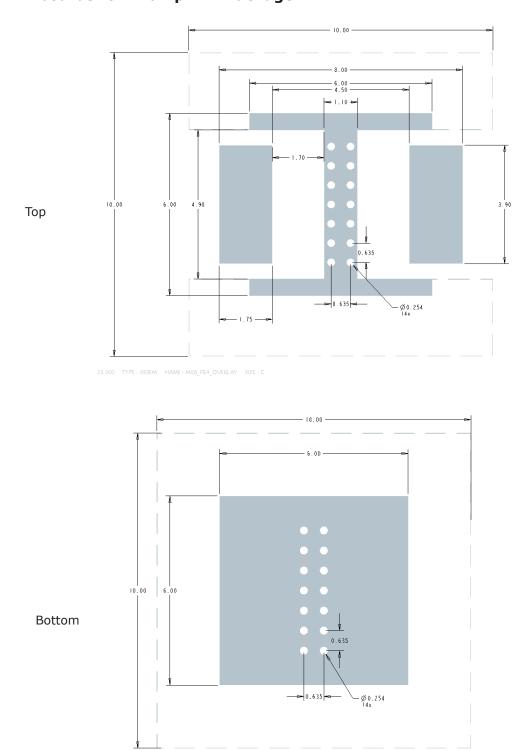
Recommended footprint for XLamp MX package on FR-4 PCB (top and bottom)
